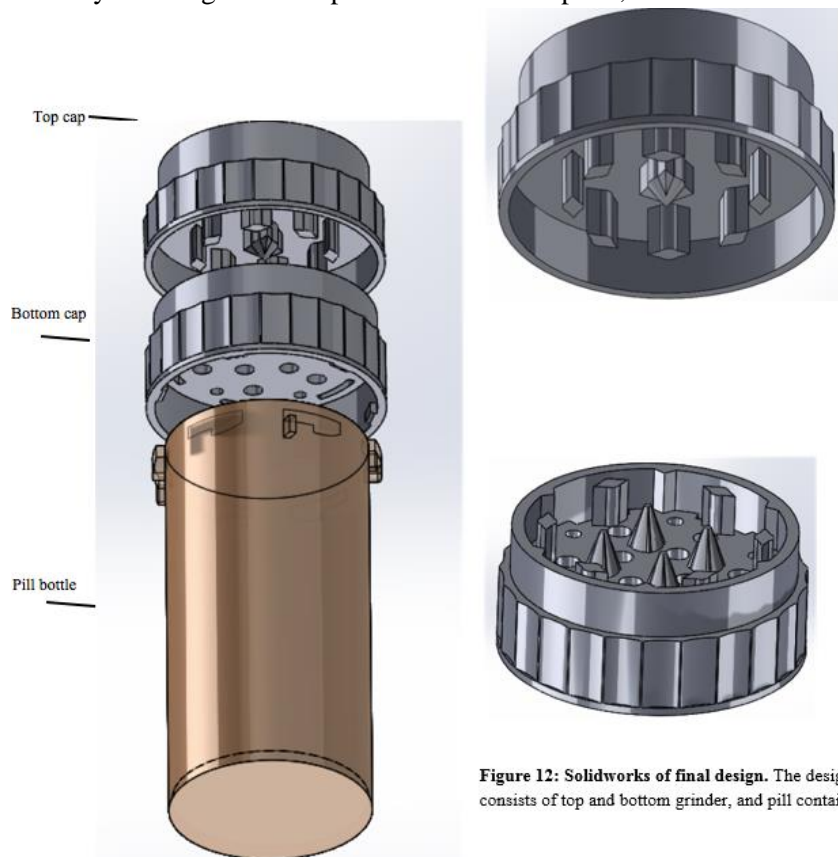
Solidworks of final design. The design consists of top and bottom grinder, and pill container.
